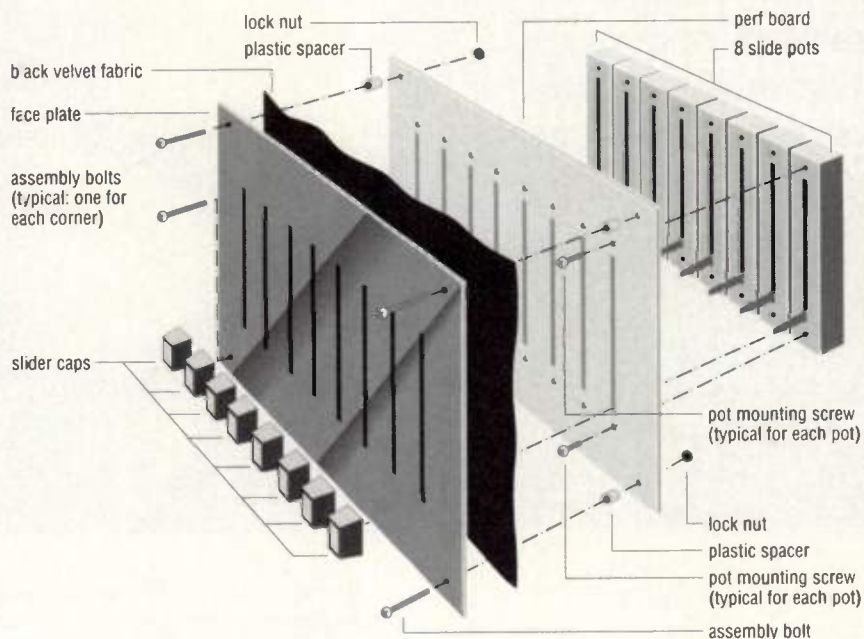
Assembly details for mounting slide pots to a metal panel.
